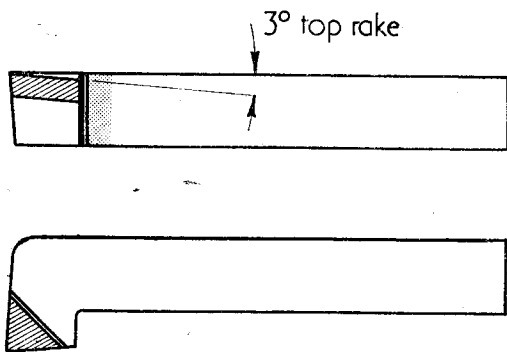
A tungsten carbide-tipped tool for turning and facing
